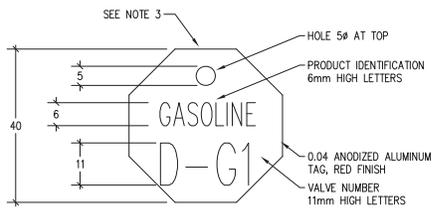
VALVE TAGS FOR GASOLINE SYSTEM
